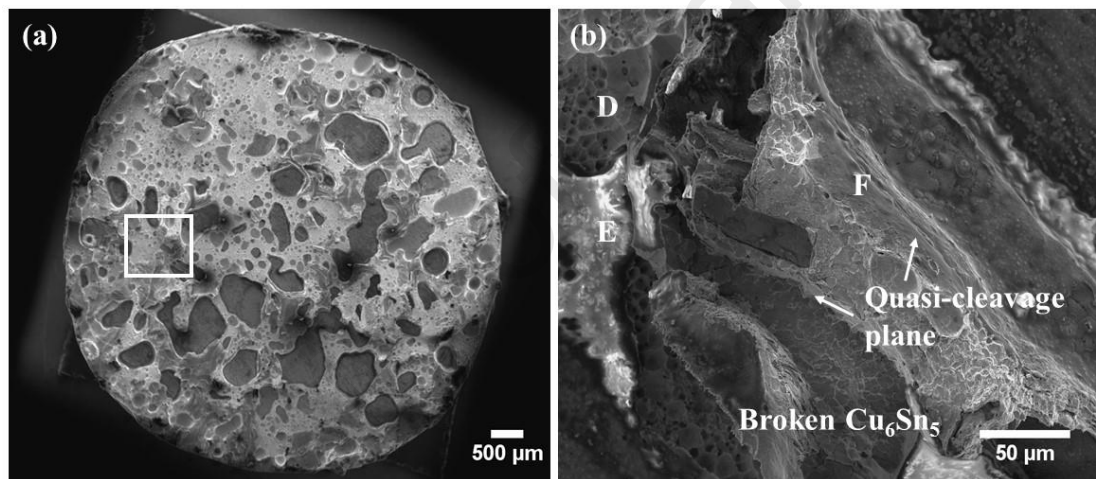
Fractured surface of solder joint with P15 porous Cu interlayer at 307°C and 300 s: (a) overall, (b) magnified view of the rectangle marked in (a)
